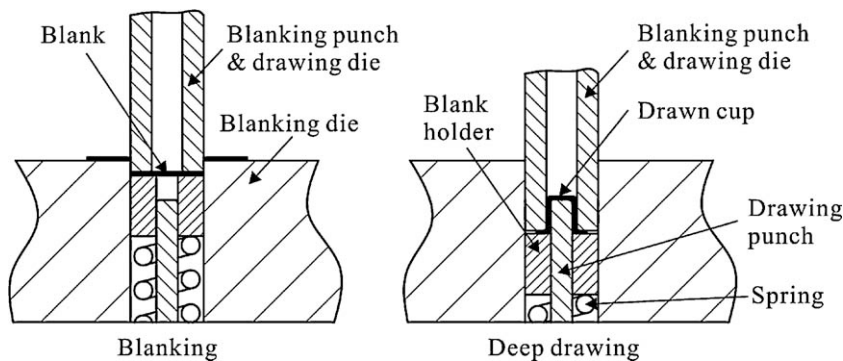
Schematic illustration of the micro blanking and deep drawing compound process.
